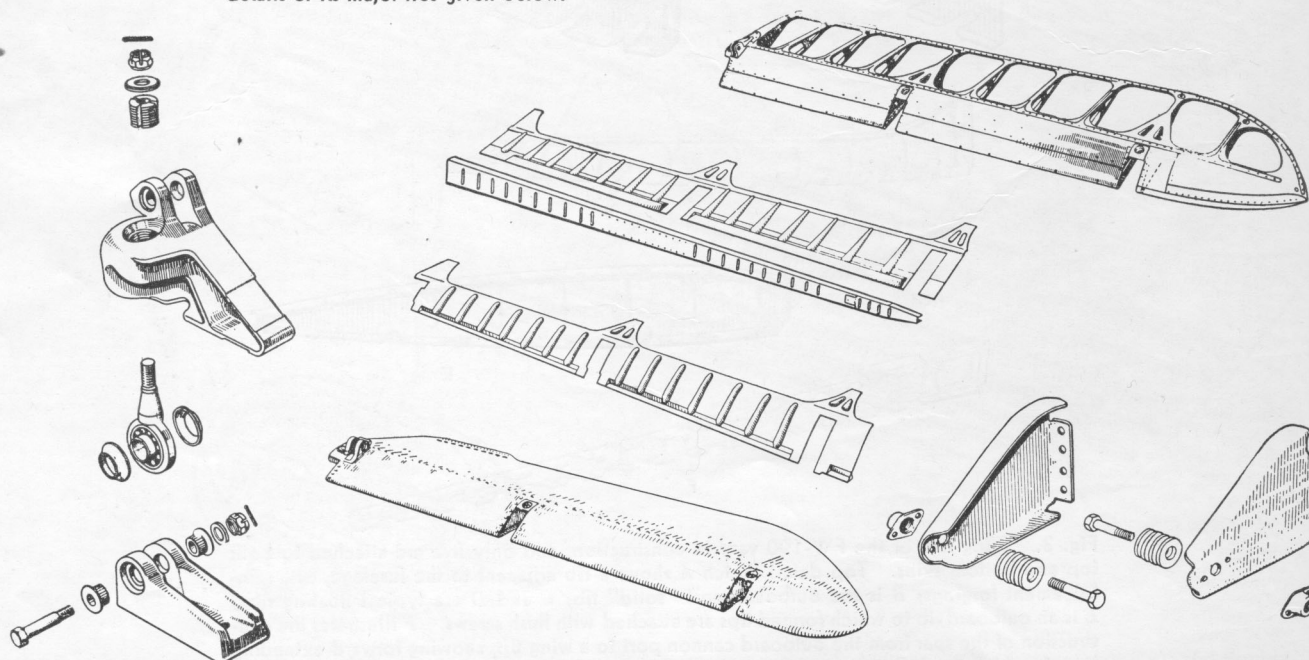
Complete details of the aileron are shown from top to bottom: unit without fabric covering; lower L.E. skin; single spar; upper L.E. skin; unit with fittings and fabric covering in place. At the left is an exploded view of the inboard ball-bearing mounting; at the extreme right is an exploded view of the outboard hinge slot ribs.
